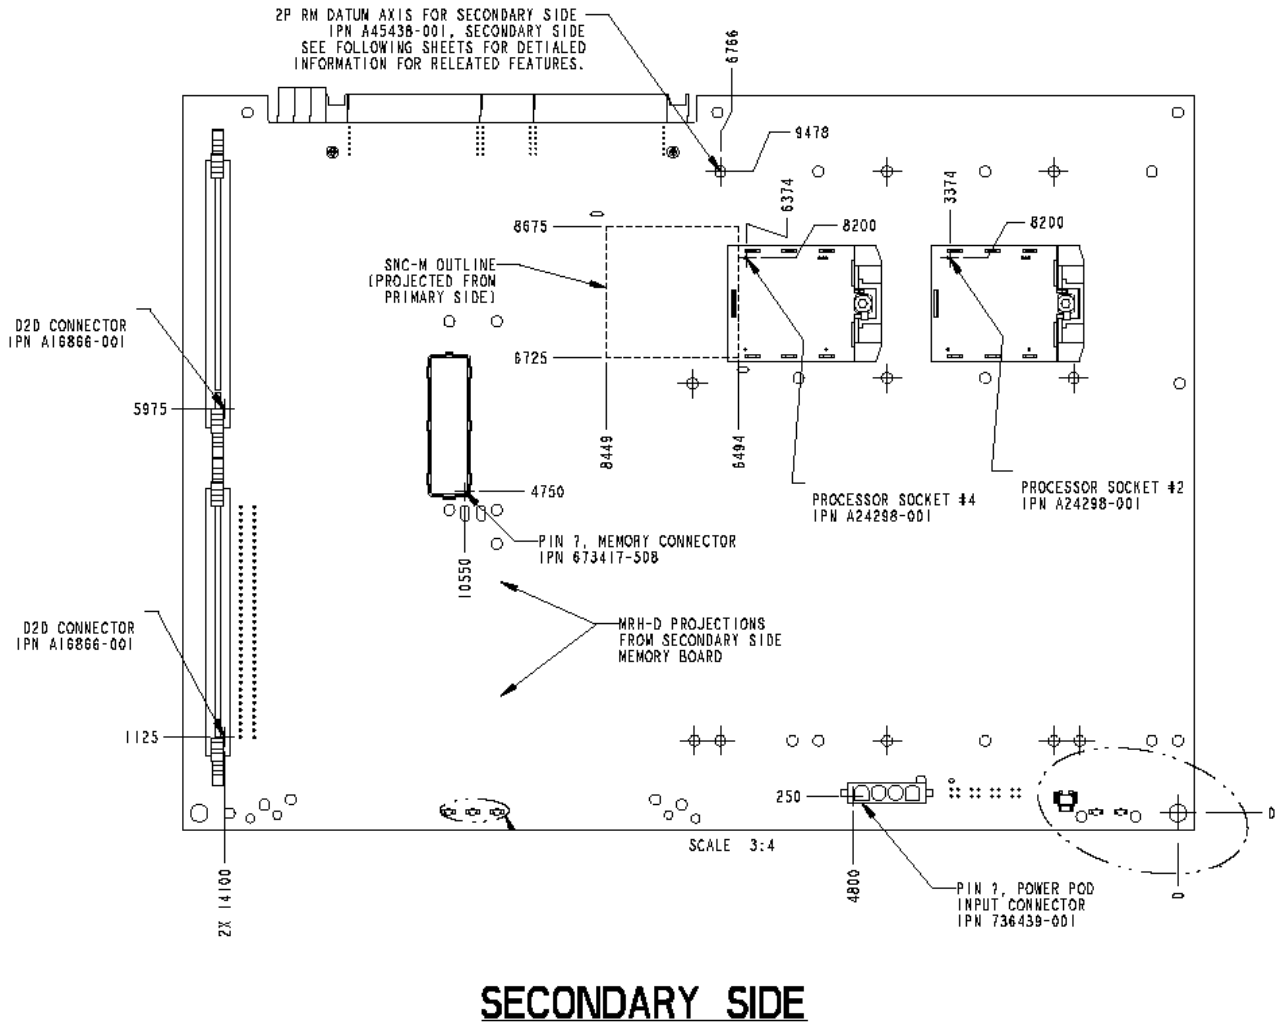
Processor Baseboard Mechanical Drawing (Secondary)
